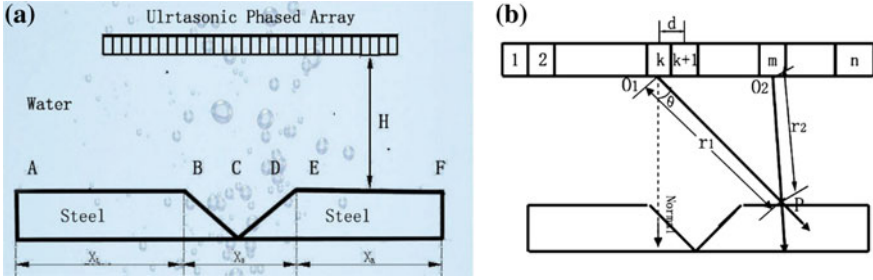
Ultrasonic PA working method in wet welding
